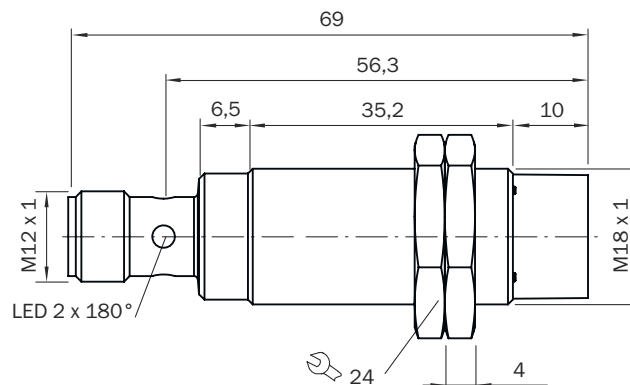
IME2S18-\*\*N\*\*C0 dimensional drawing
